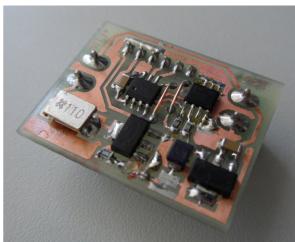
Thermostat PCB Layout (dimensions, 36 x 28 mm)
